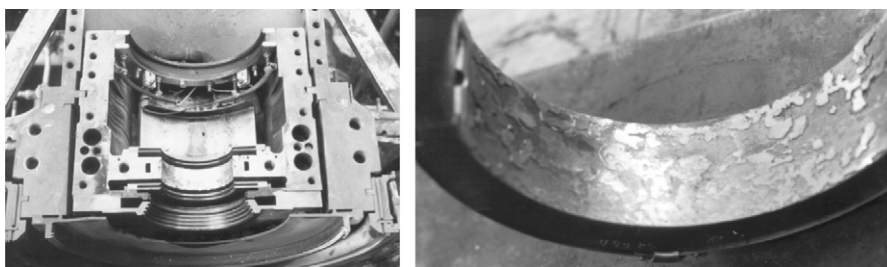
Journal bearing babbitt has been mainly wiped out due to excessive rub.
